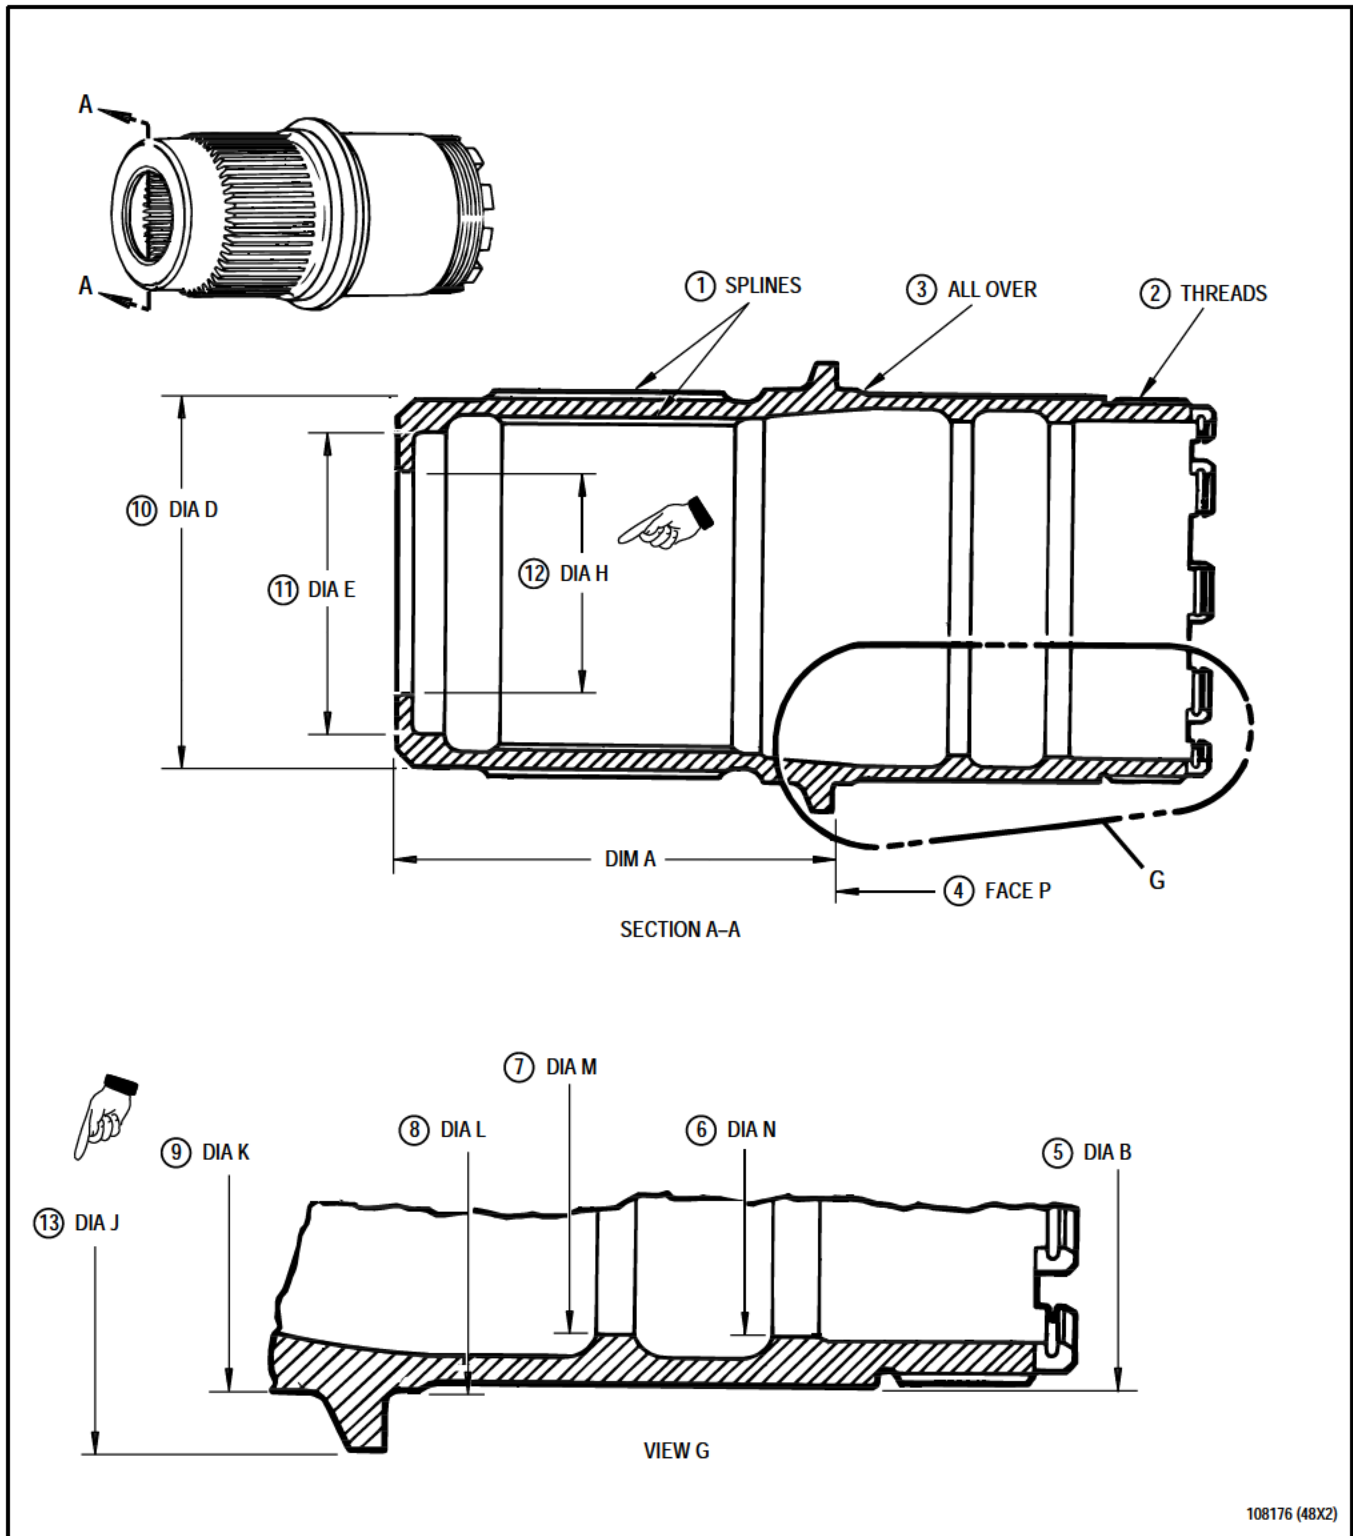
Turbine Shaft Coupling - Inspection and Repair (Sheet 1 of 2)
